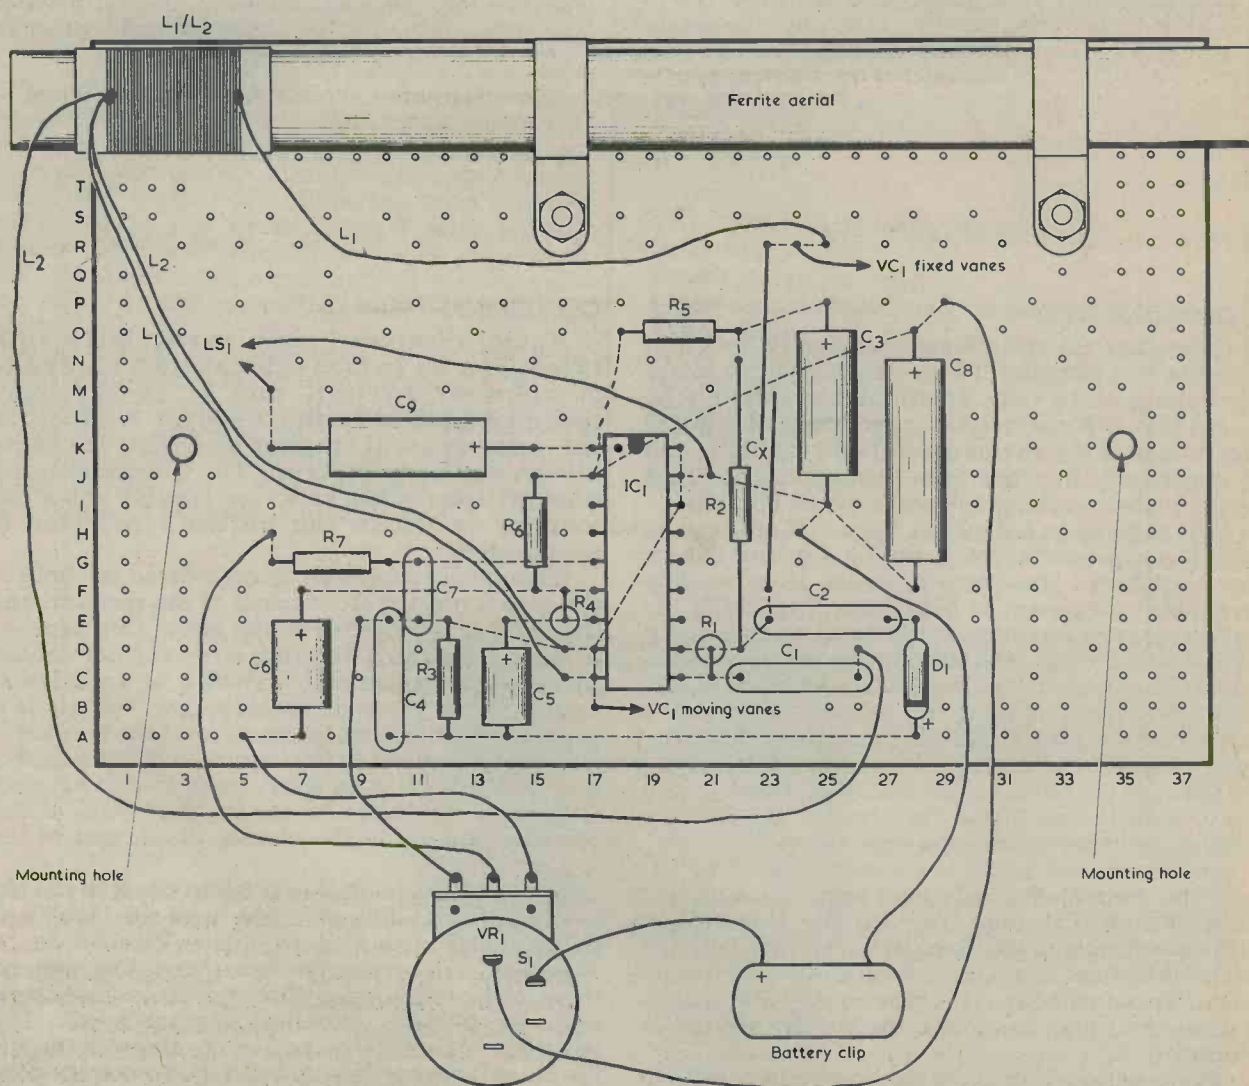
Apart from the battery and the components on the front panel of the case, all the parts are assembled on a perforated s.r.b.p. board of 0.1 in. matrix. Interconnections below the board are shown in broken line.
